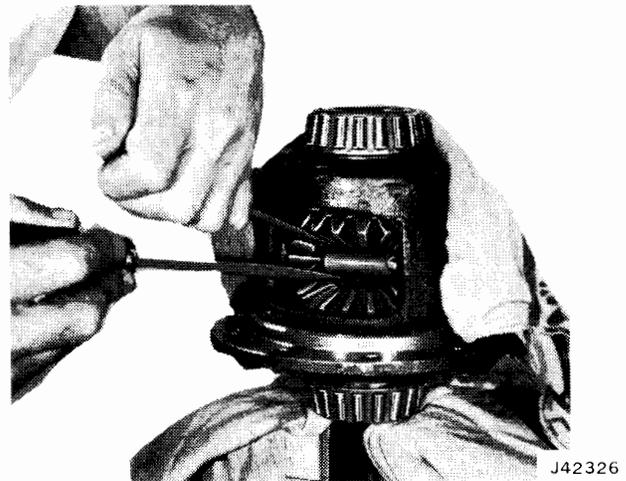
Removing Snap Rings from Pinion Mate Shaft
